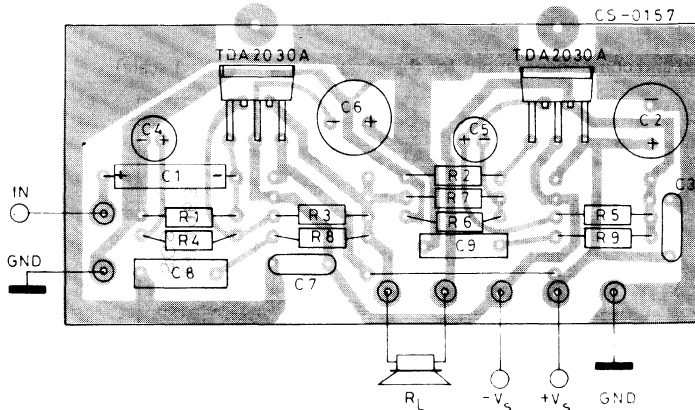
P.C. board and component layout for the circuit in fig. 16 (1:1 scale)
